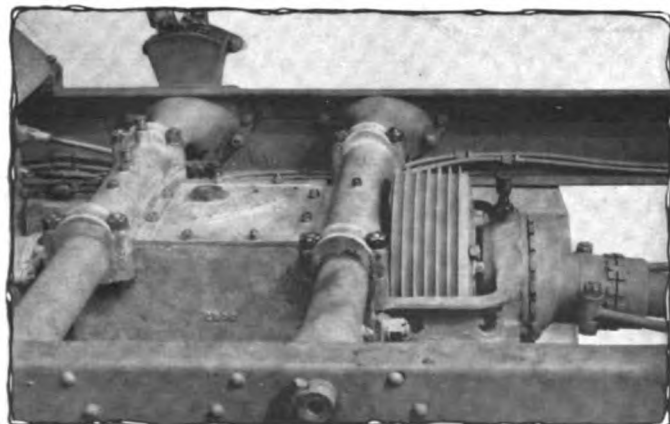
Crossley gearbox attachment on the 1913 20-horsepower chassis
